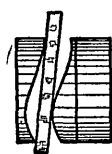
Contacts worn unevenly. A flat .020" gauge spaces contacts .030" to .050"
